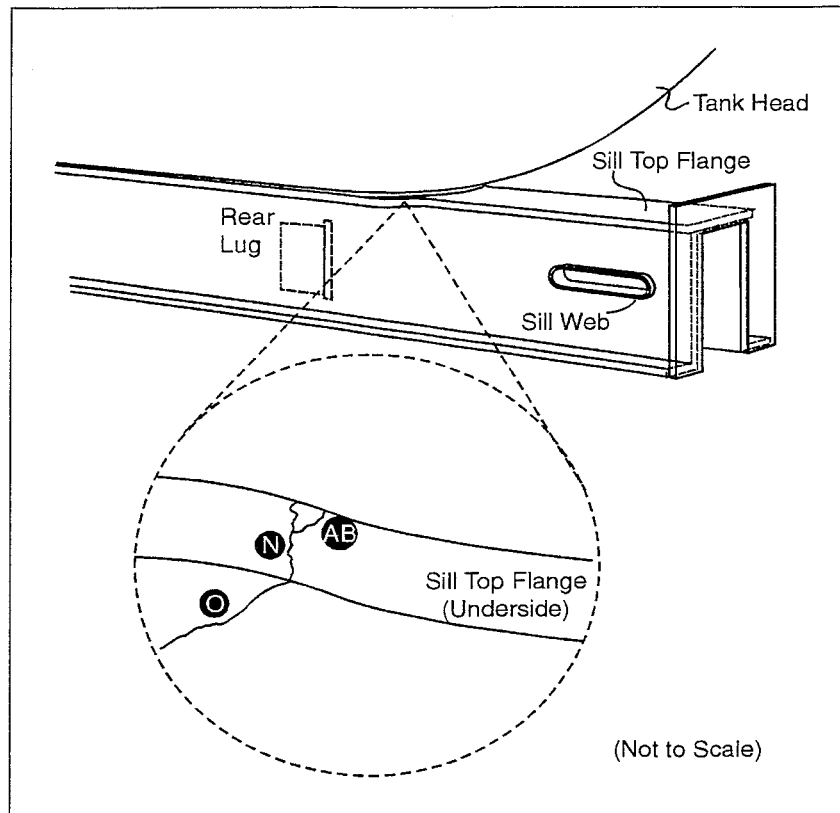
A-end Right Sill Top Flange Cracks
